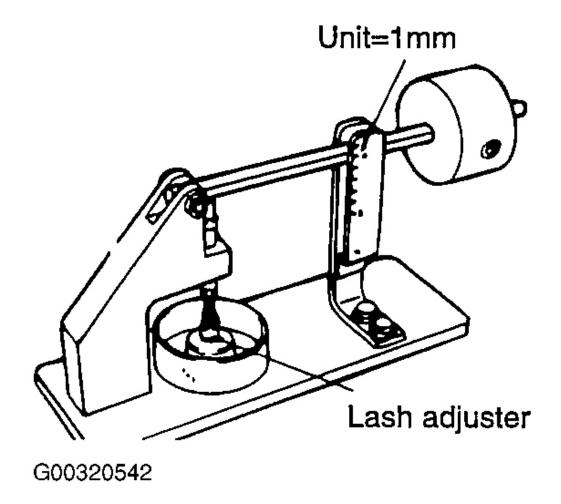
Measuring Lash Adjuster Drop Courtesy of KIA MOTORS AMERICA, INC.
